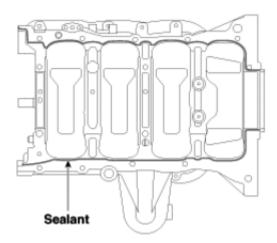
Identifying Sealant Applying Area On Cylinder Block And Ladder Frame
